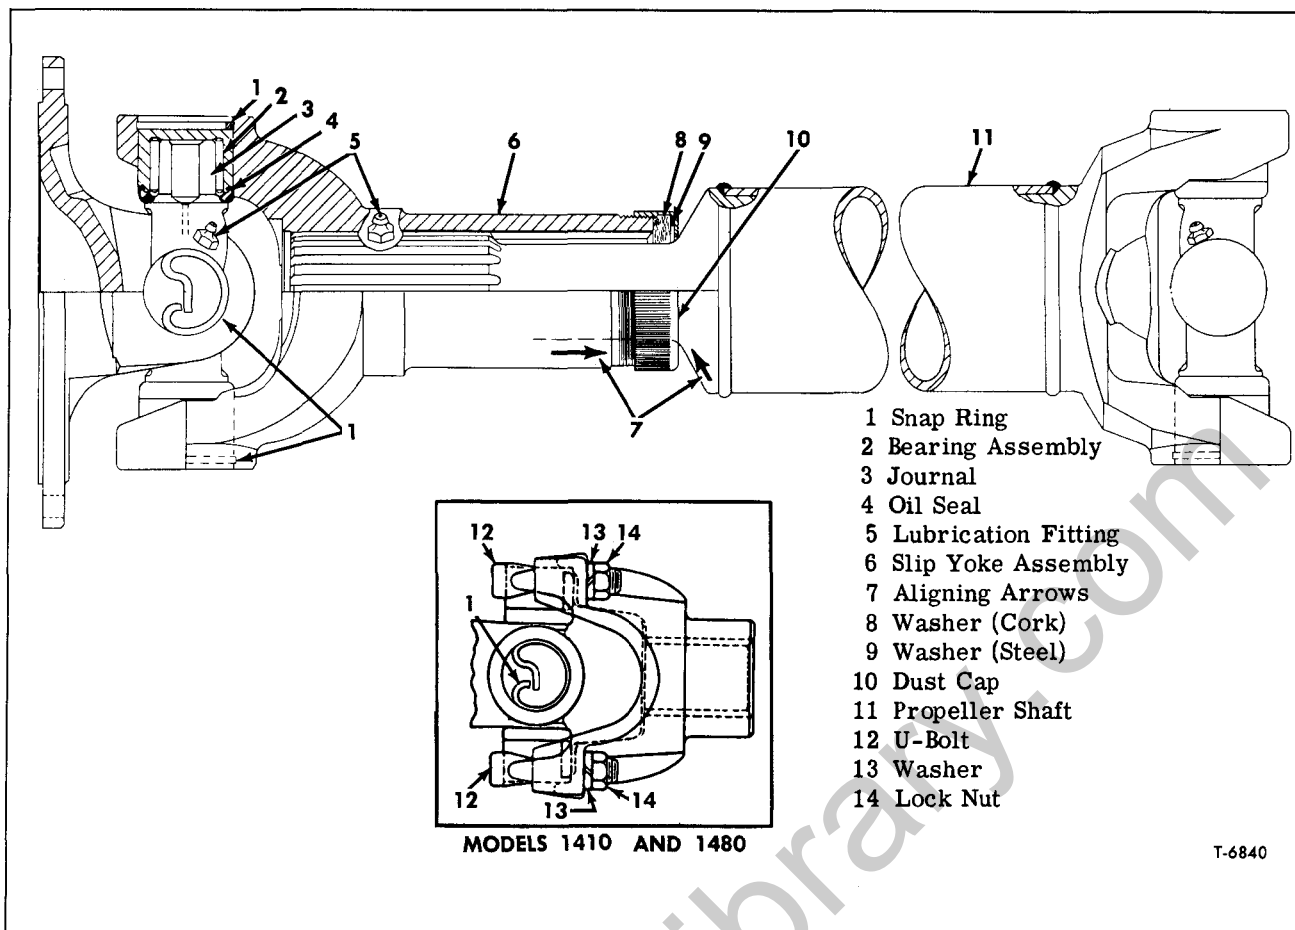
Typical Propeller Shaft with Type 1410 and 1480 Universal Joints
